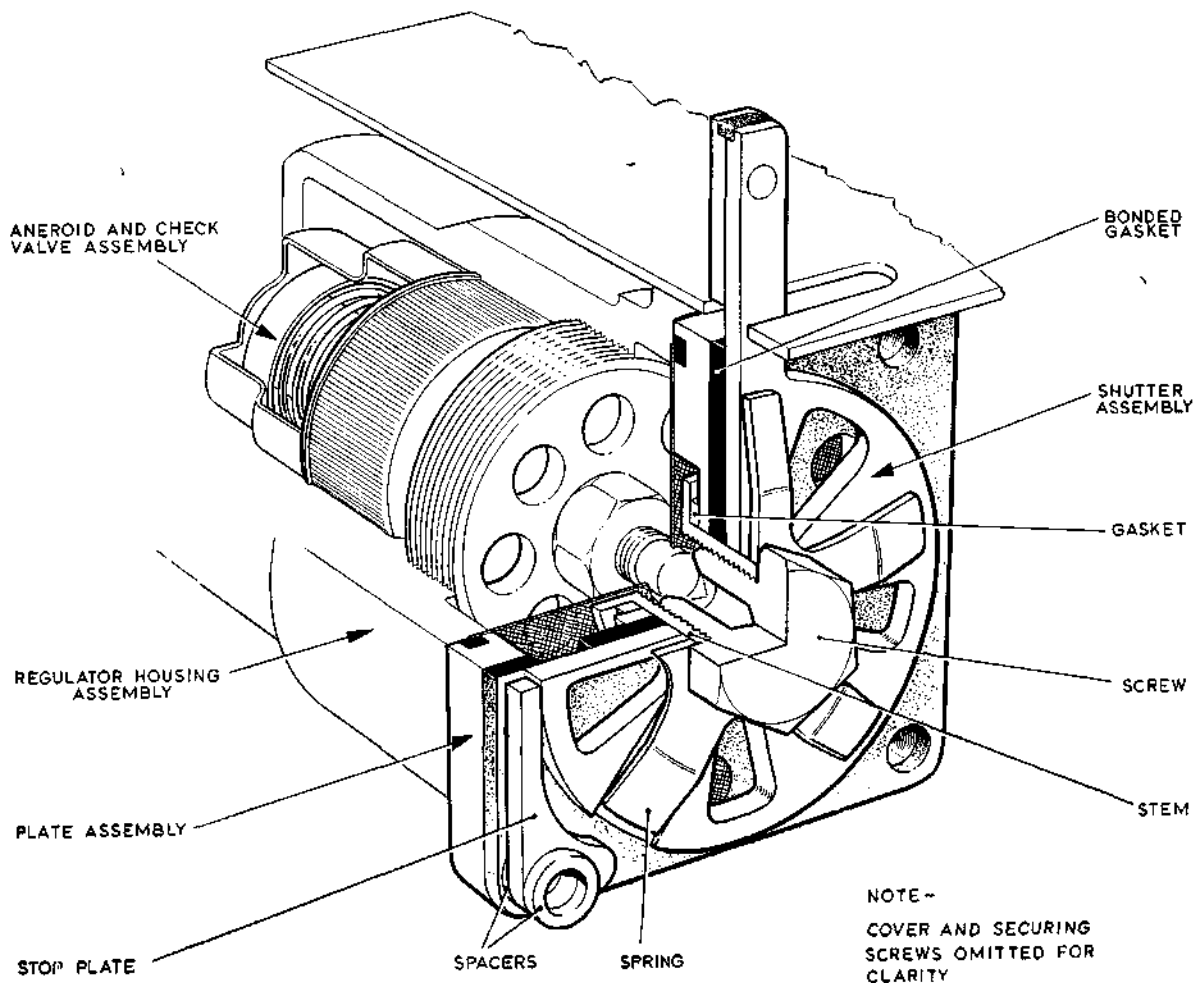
Air inlet shutter assembly—Mk. 17G regulator
